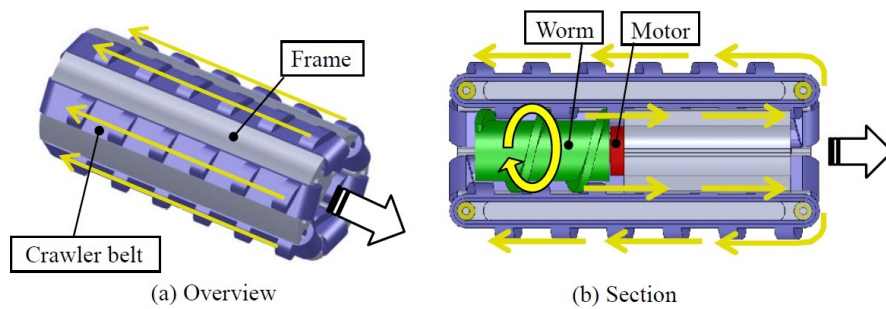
Cylindrical crawler robot uses a screw to drive the tracks [69].
